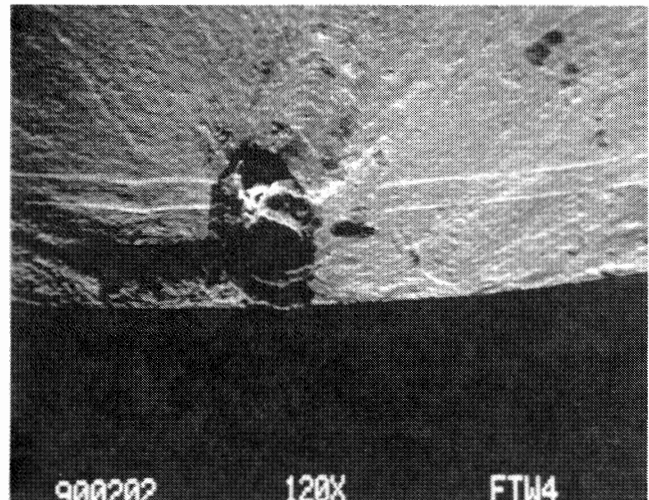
Scanning Electron Micrograph of Nonmetallic Inclusion in Fractured Surface of Fatigue Specimen.
